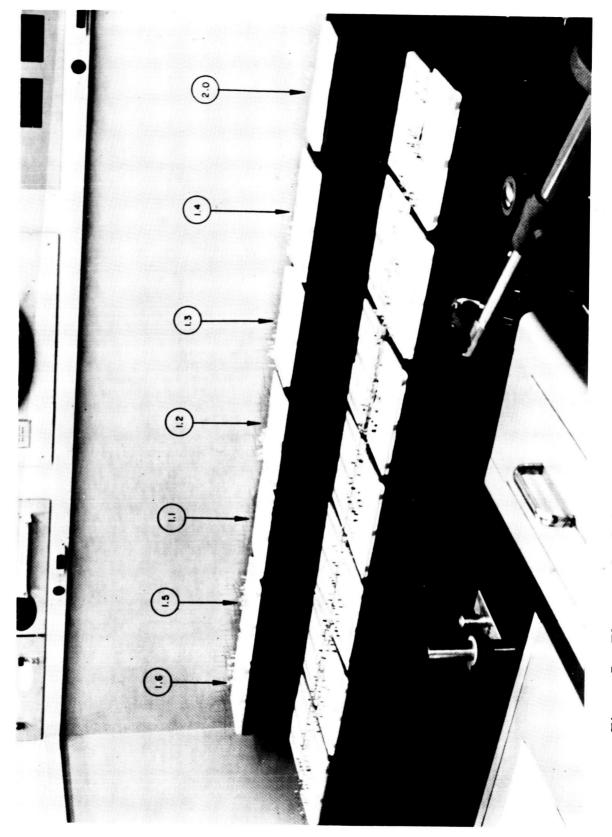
Photograph of all seven types of weld-joint specimens (R105346).
